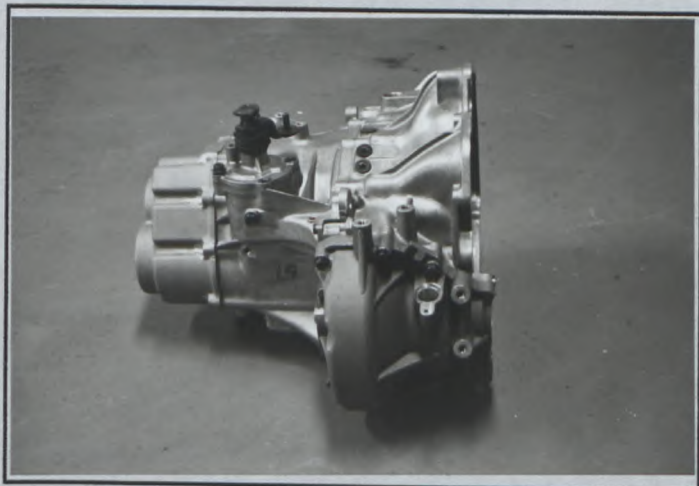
SEQUENTIAL TYPE GEARBOX ASSY.
